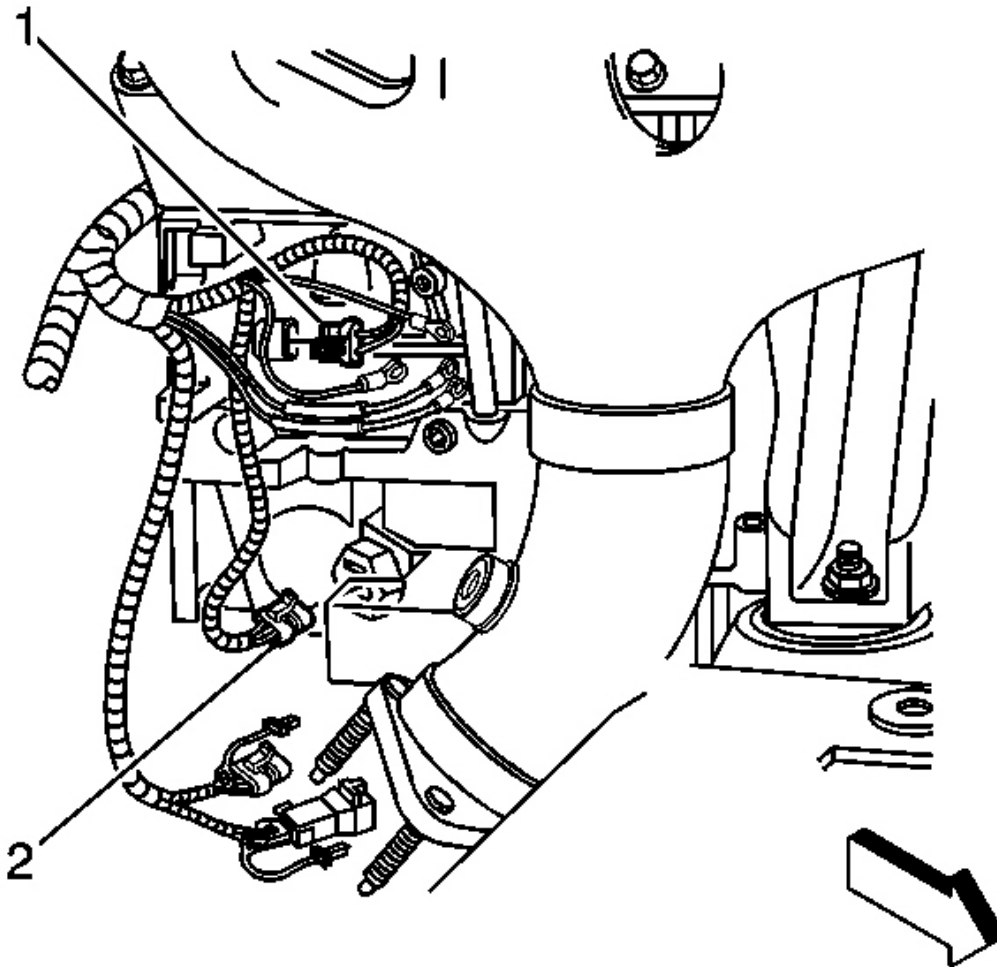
Engine Oil Level Sensor Electrical Connector & CKP Sensor Electrical Connector
